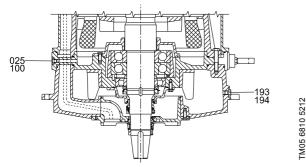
Test plugs in shaft seal housing and lower bearing bracket
